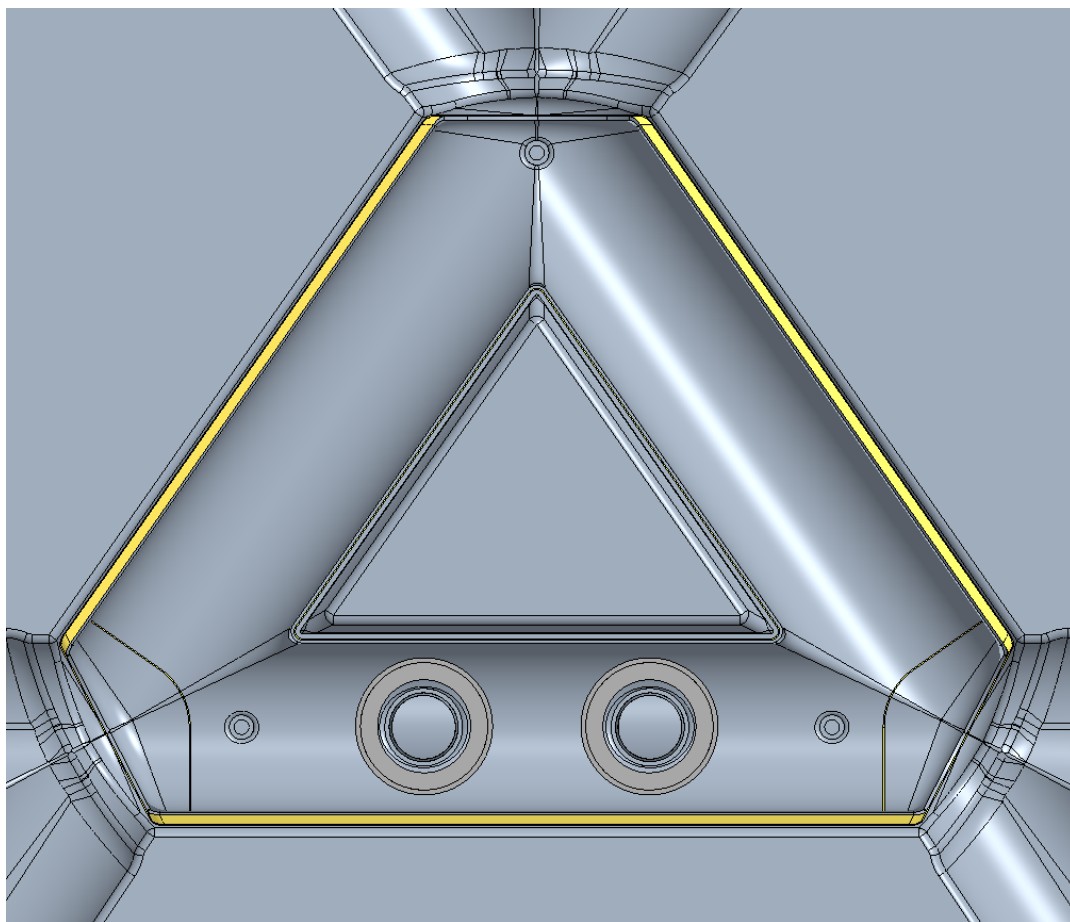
Tube Hydrogen Vessel Assembled into Tube Vacuum Body along with Vacuum Spacers. The opening in the Vacuum Body is designed to just allow the Hydrogen Vessel to pass through.
